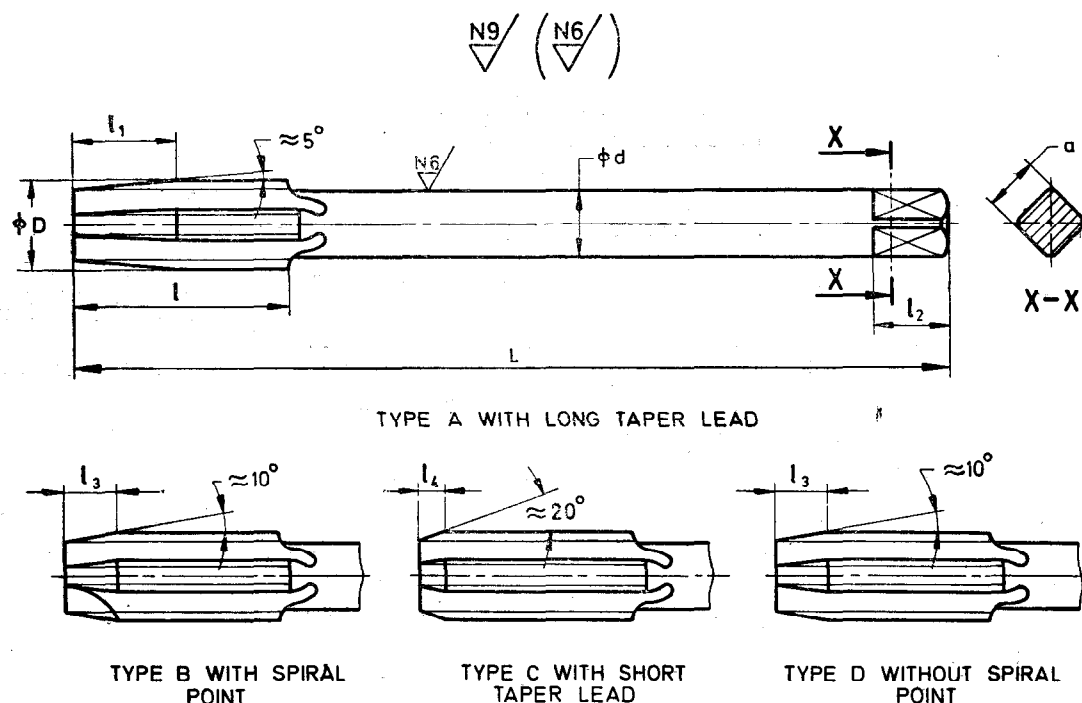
DIMENSIONS FOR LONG SHANK MACHINE SCREWING TAPS
